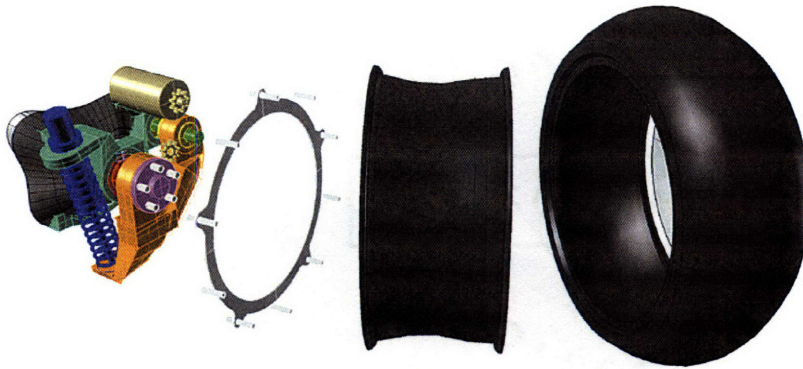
, Wheel Robot 2, tire, rim, brake disc, wheel robot explosion
